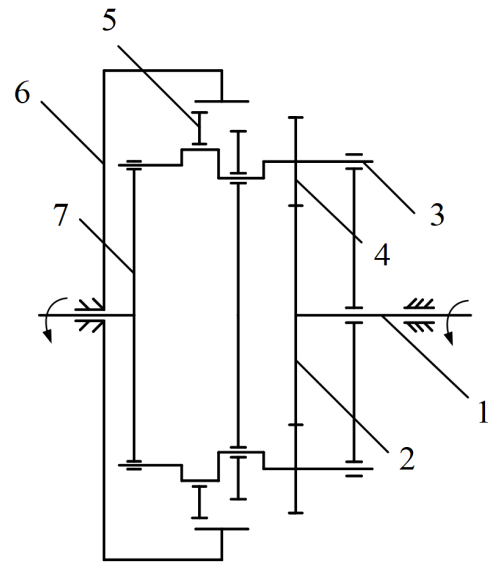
Schematic diagram of Involute RV reducer transmission. 1-input shaft 2- input gear shaft 3- planet gear 4-crank shaft 5-external gear 6- internal gear 7- output disk.
